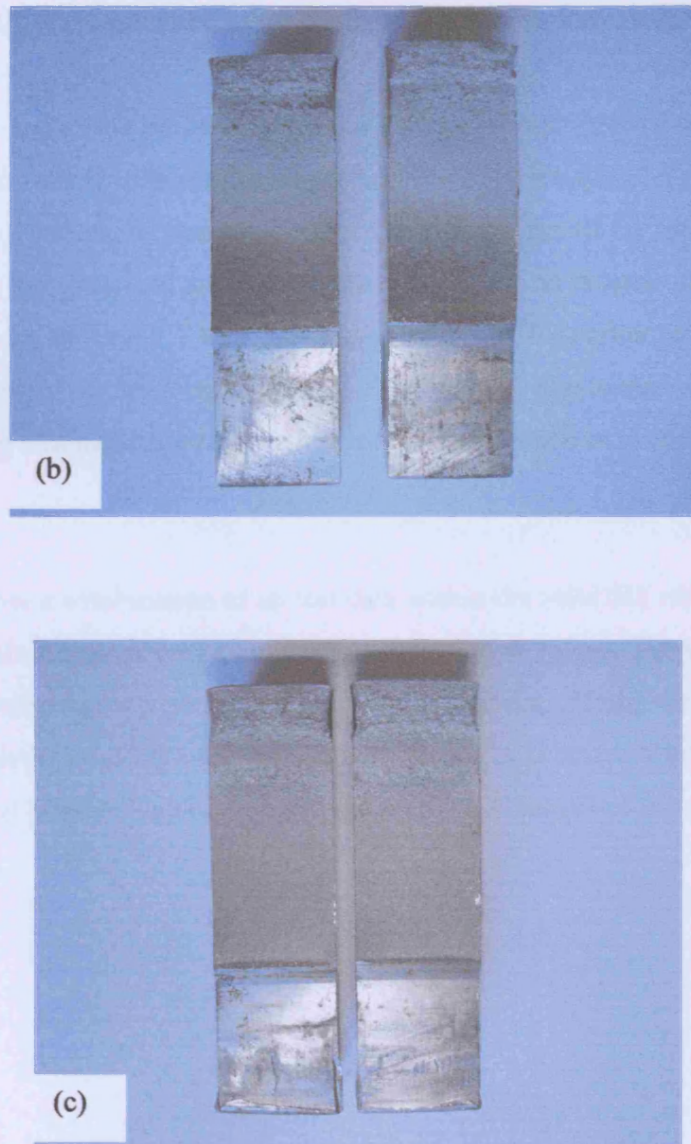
(b)-(c): Fracture surfaces of (b) Test CT 2 and (c) Test CT 3.
